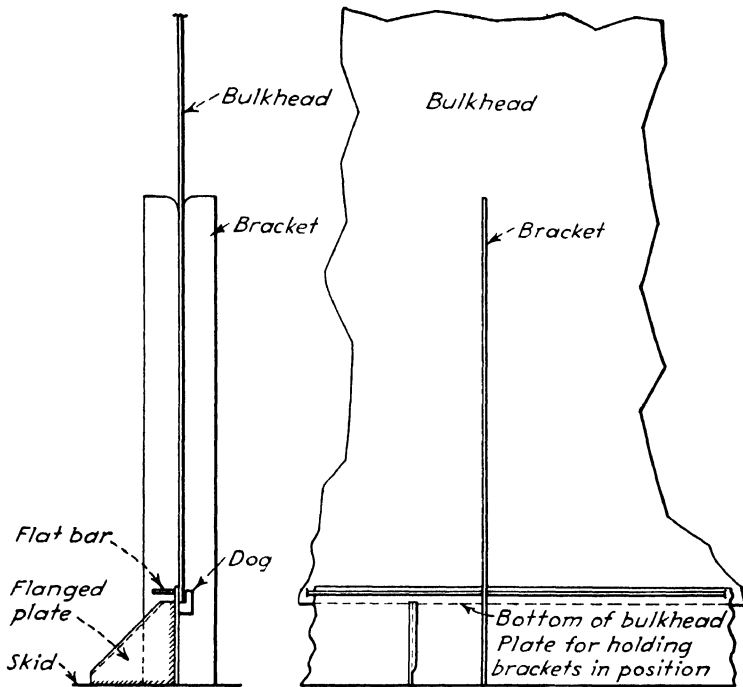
Brackets for erection of bulkheads or superstructure assembly.
